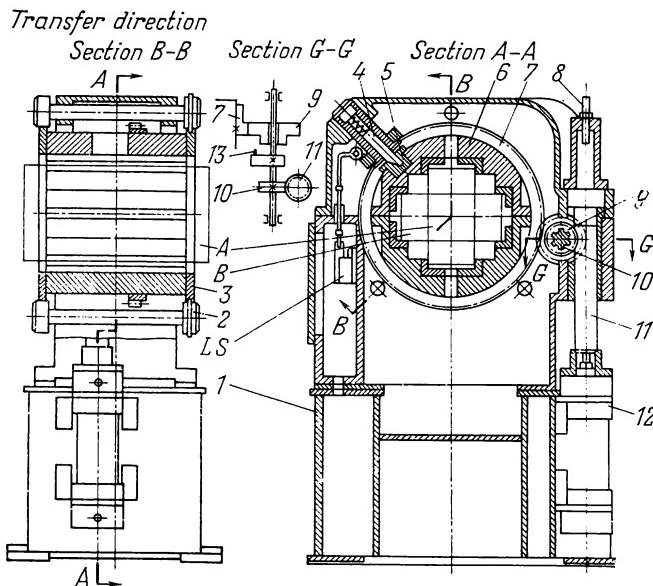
Drum for turning a workpiece 90° about a horizontal axis
